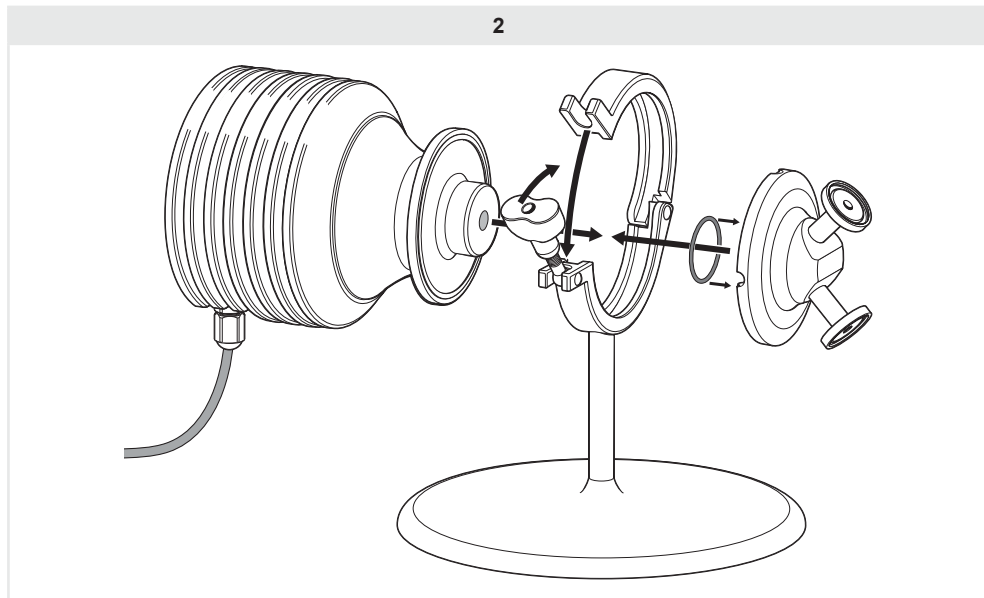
Refractometer stand assembly: Installing the refractometer and Mini Flow Cell to the stand.
